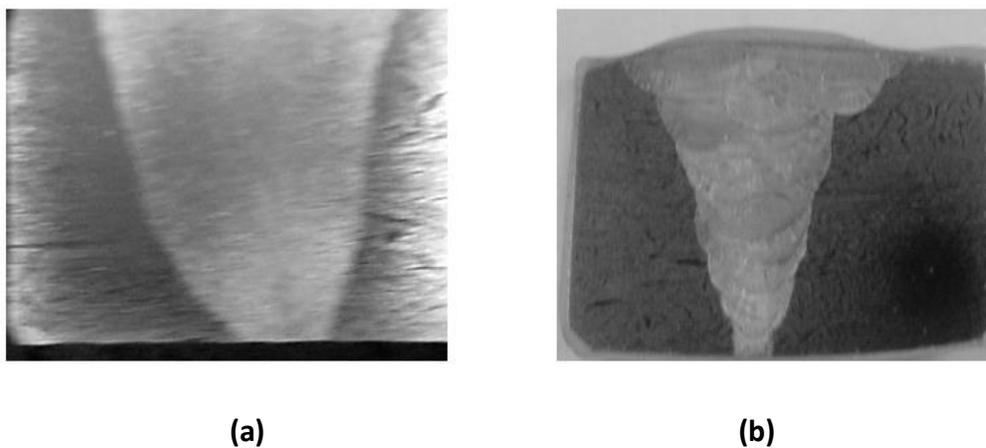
Cross sections of the type 316 LN Stainless steel weld (12 mm thick) produced by (a) A-TIG welding (b) Multi-pass TIG welding
